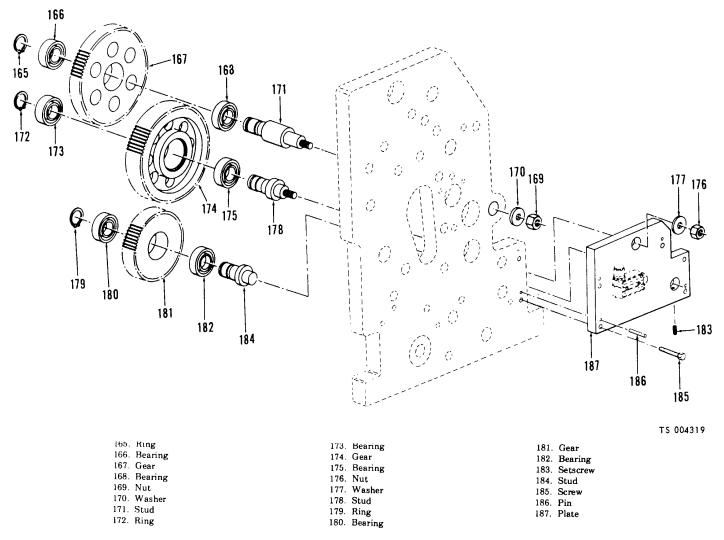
Cylinder and main drive assembly (Sheet 5 of 5).
